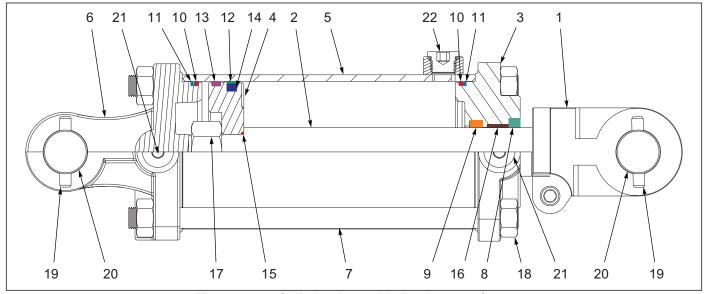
Cylinder Assembly Rephase 3-3/4 x 6
